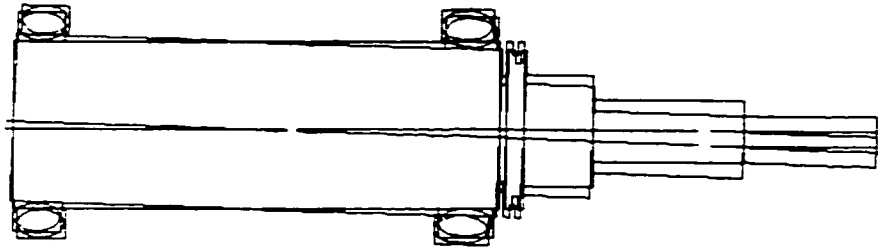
Vibrations Resulting from Worn Spindle Bearings
